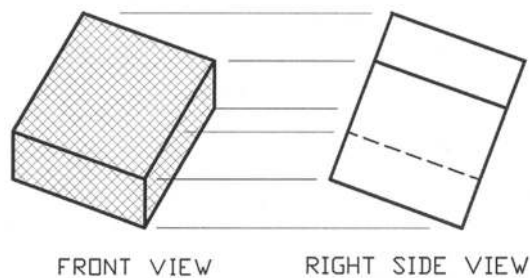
Views after Rotation about Horizontal Axis (Tilting)
